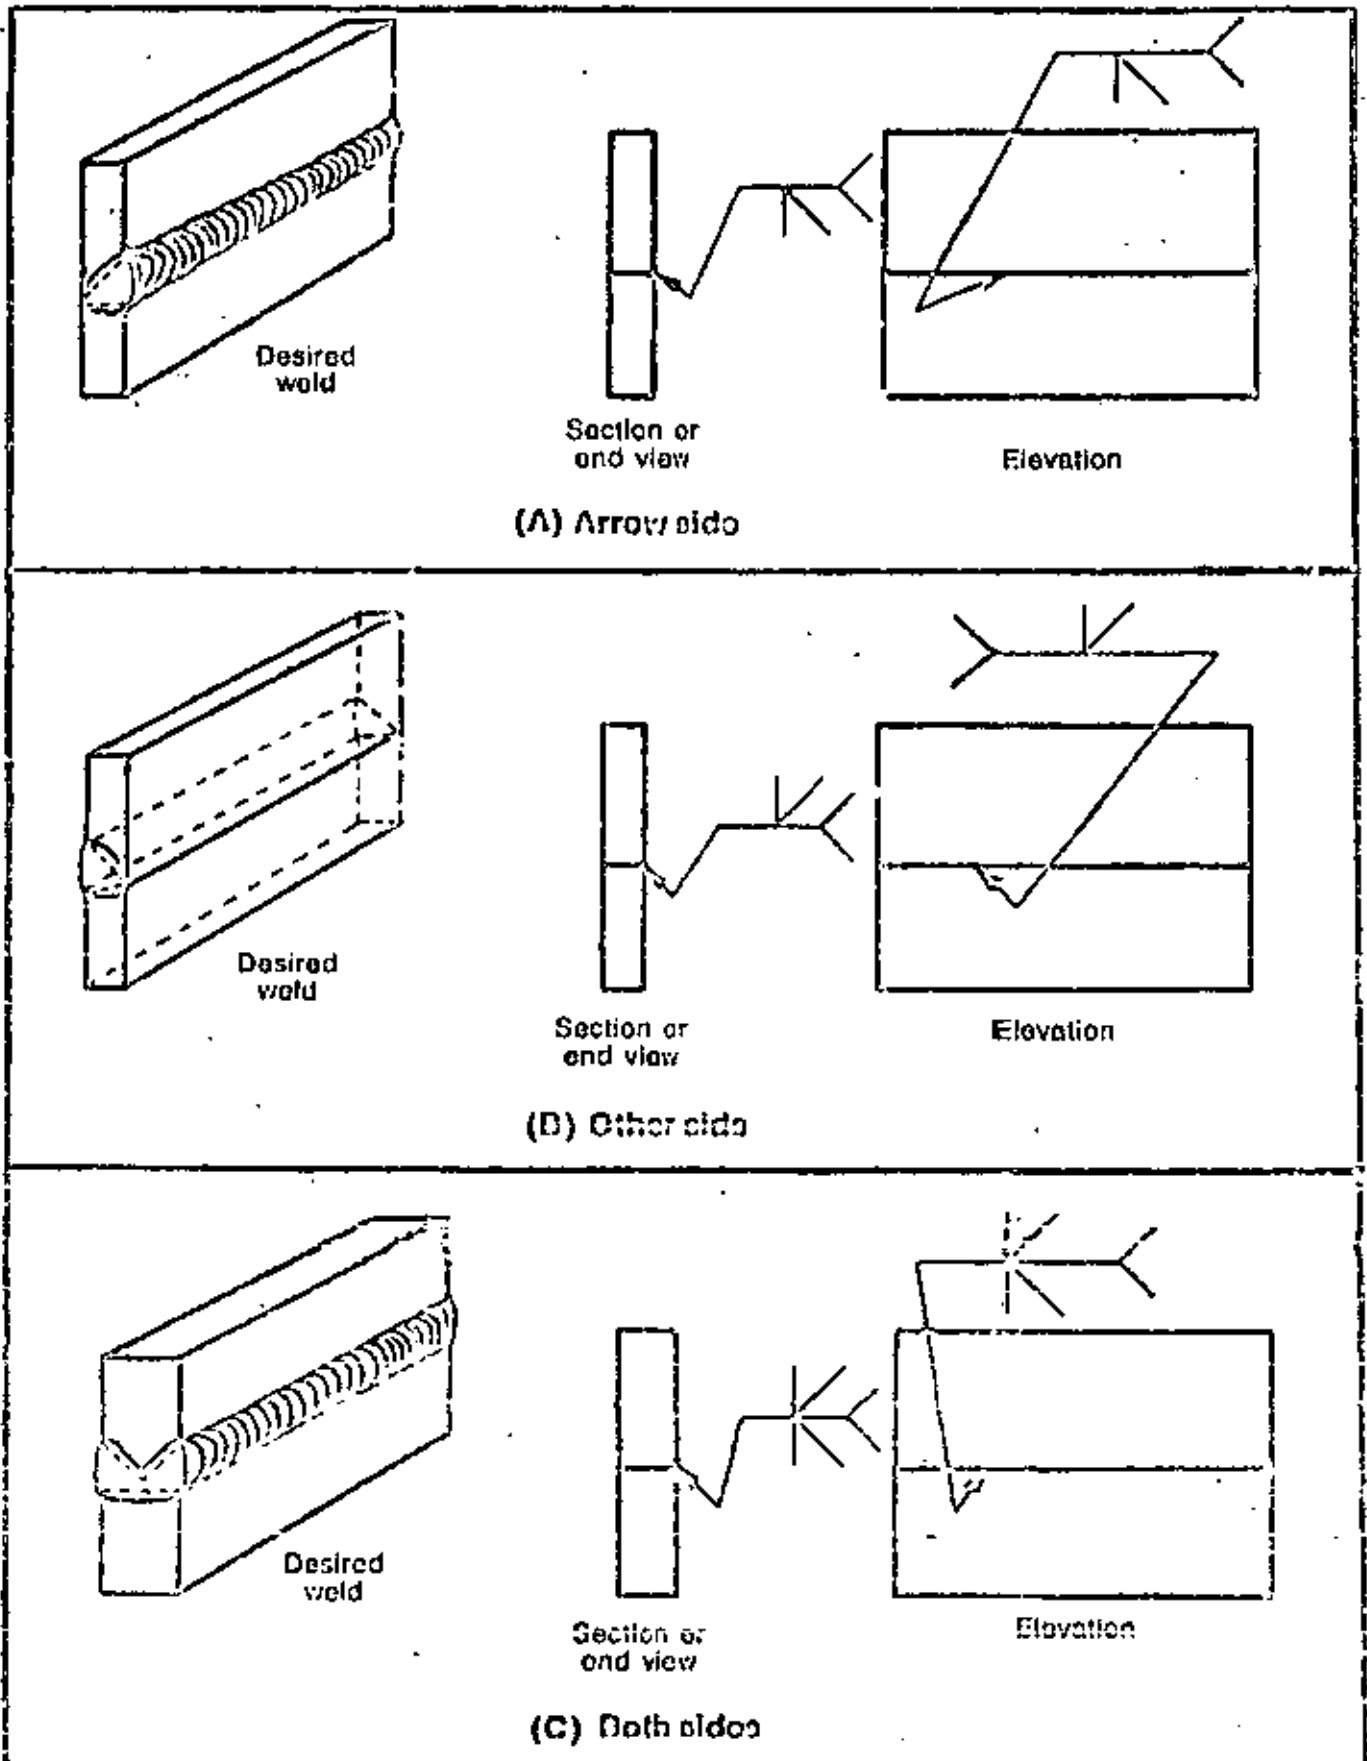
Application of break in arrow of welding symbol (bevel-groove weld).
